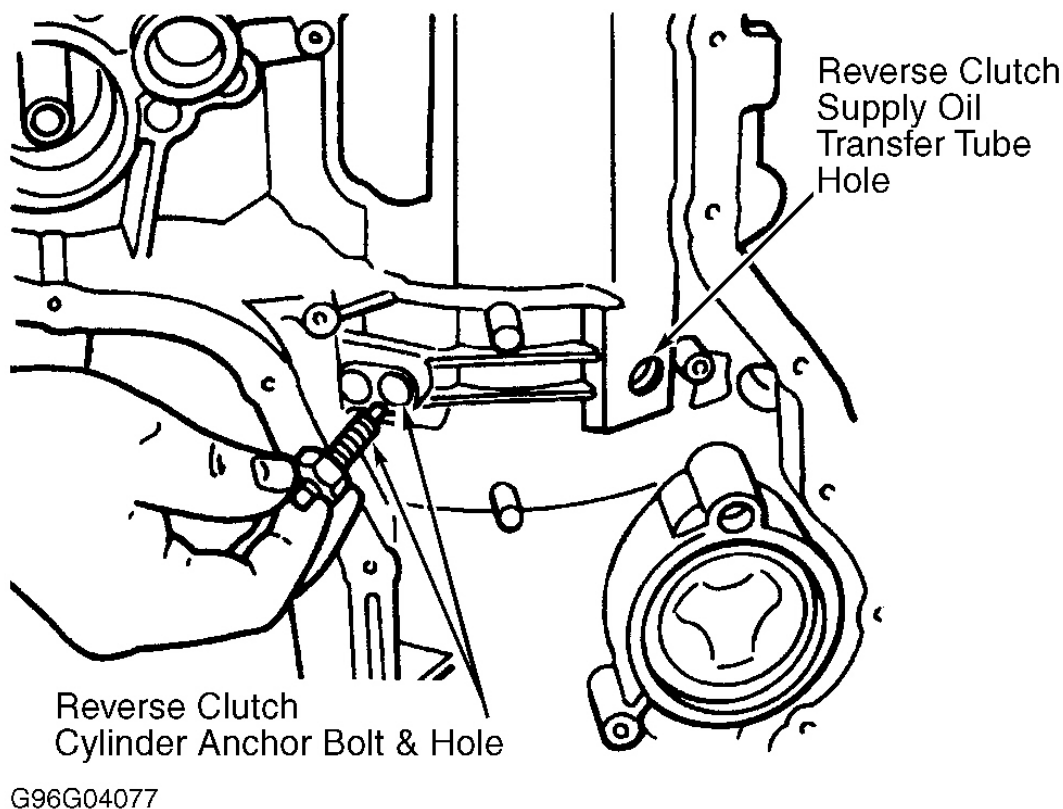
Reverse Clutch Anchor Bolt & Oil Transfer Tube Holes
